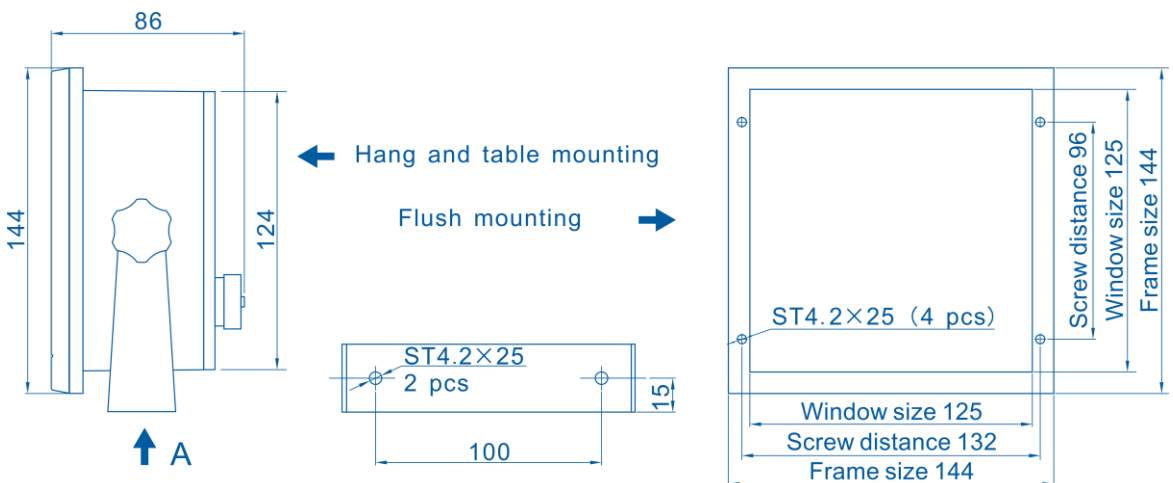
Dimension of Rudder Angle Indication Unit AD805
